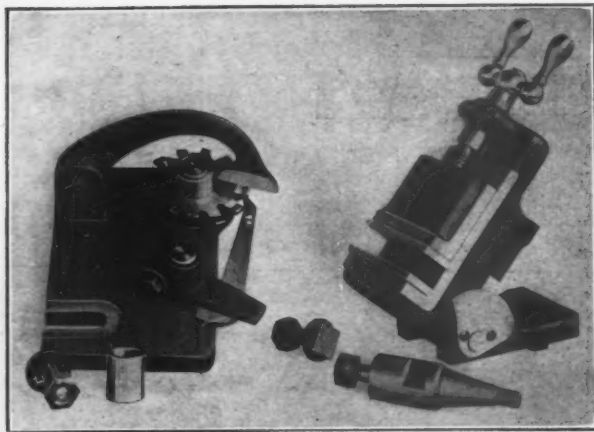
The Gear Cutter Grinding Attachment and Universal Vise.
